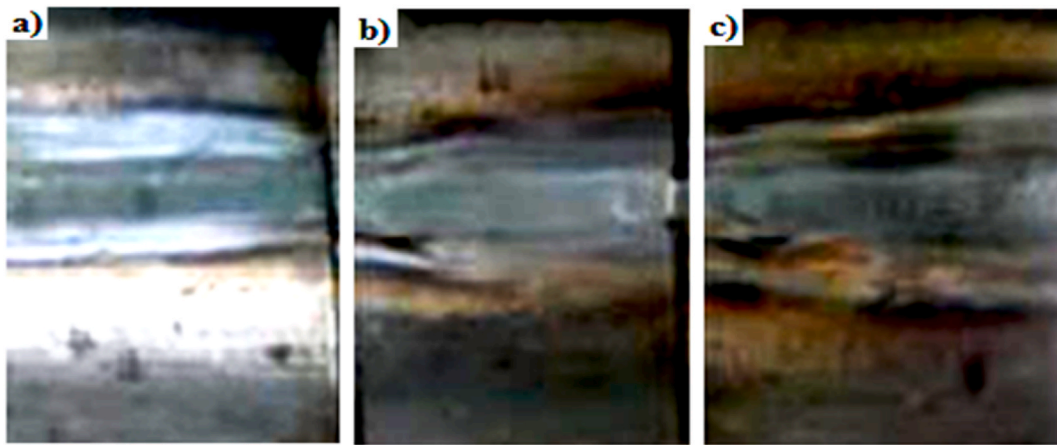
Welded Samples of different heat input a) 0.608 kJ/mm, b) 0.900 kJ/mm, and c) 1.466 kJ/mm.
